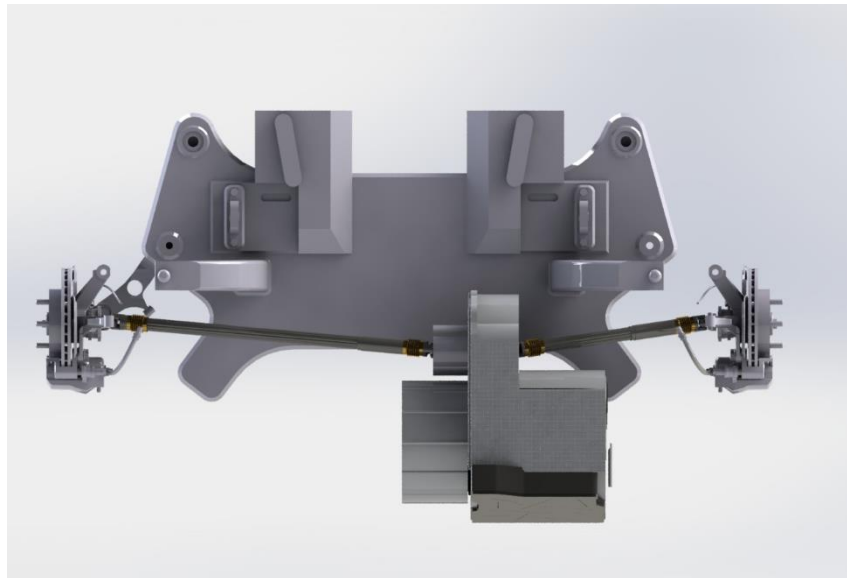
The Gearbox, Axle Shafts, Front Suspension in top view
